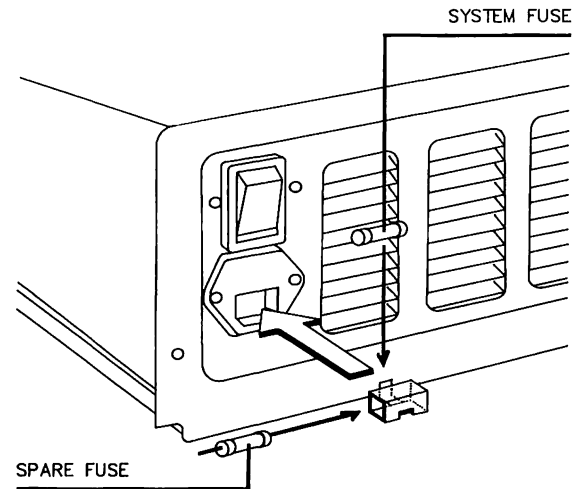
COMPAQ DESKPRO 286 Fuse Holder with Spare
